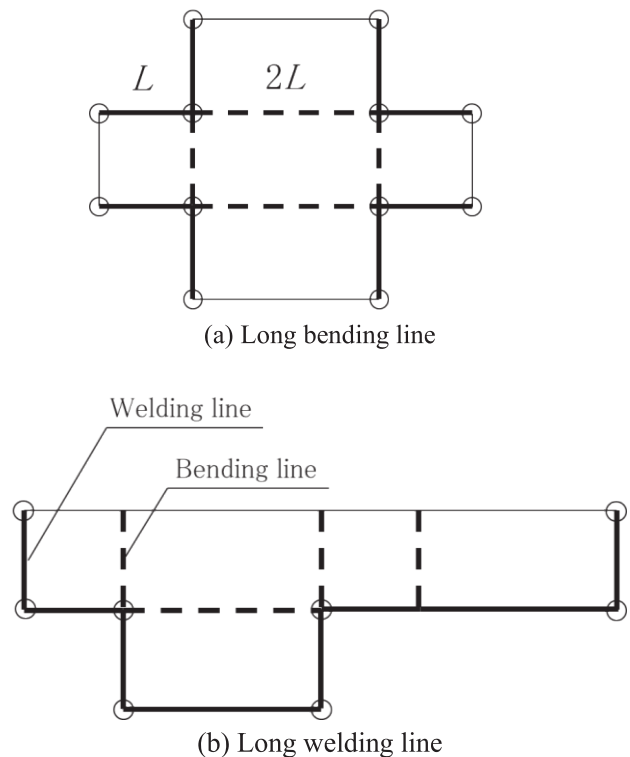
Example of development drawing of open box shape and its bending line / welding line
